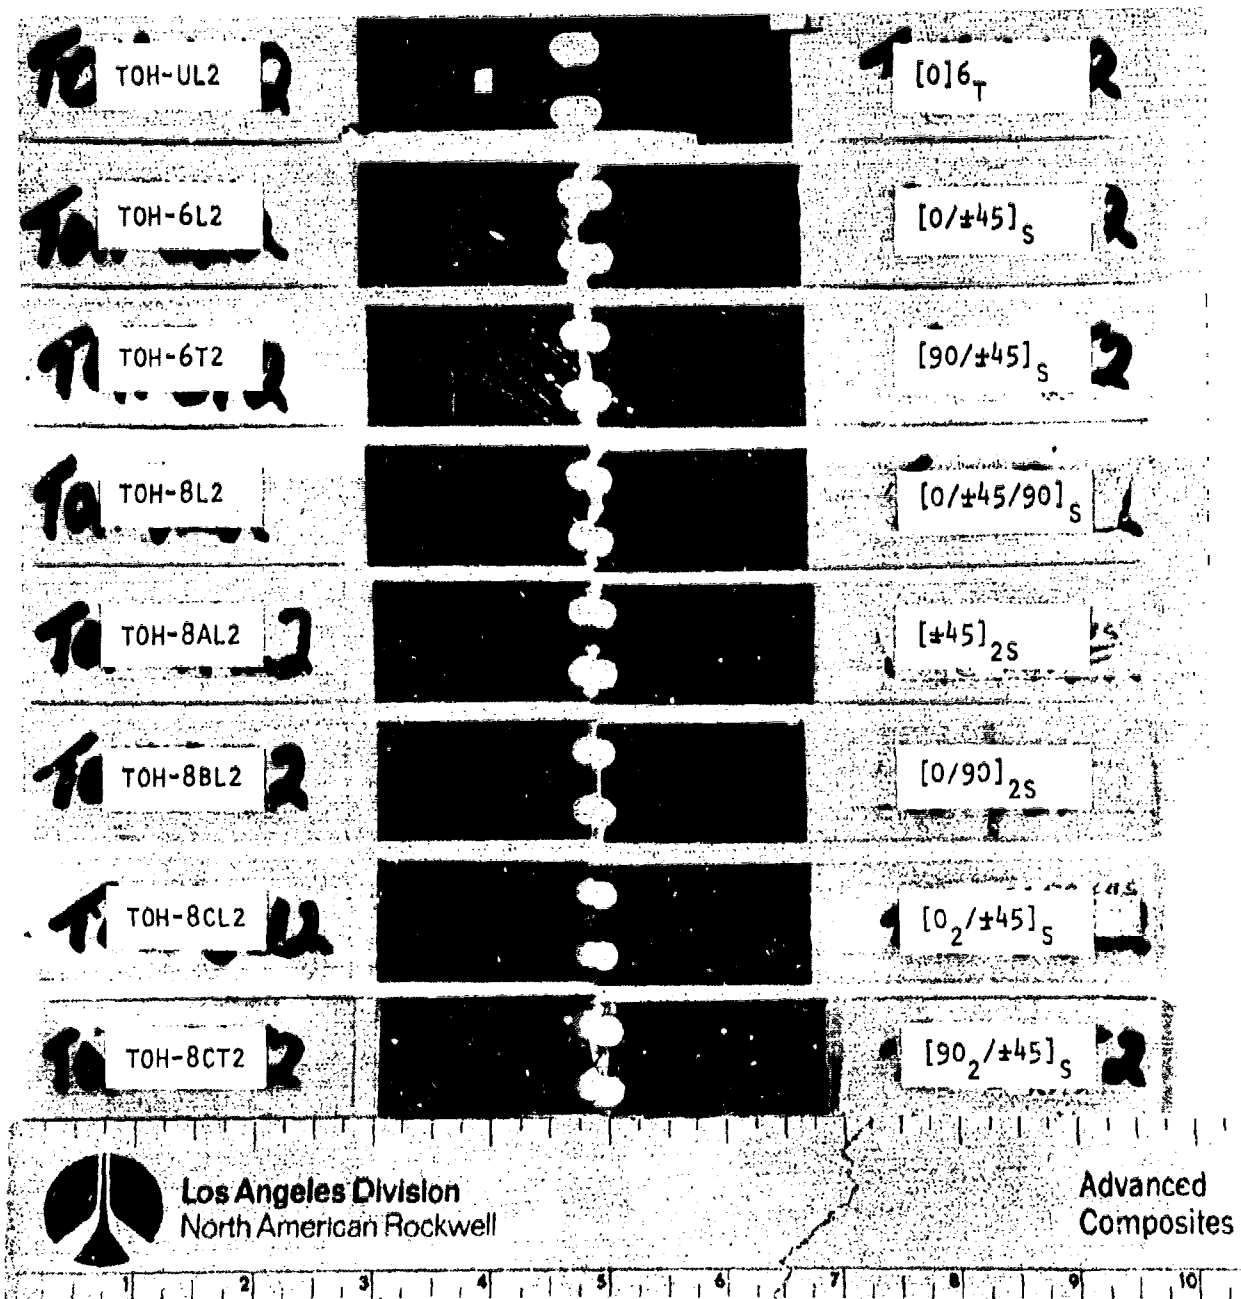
Typical Failed Open Hole Graphite/Epoxy Specimens -
